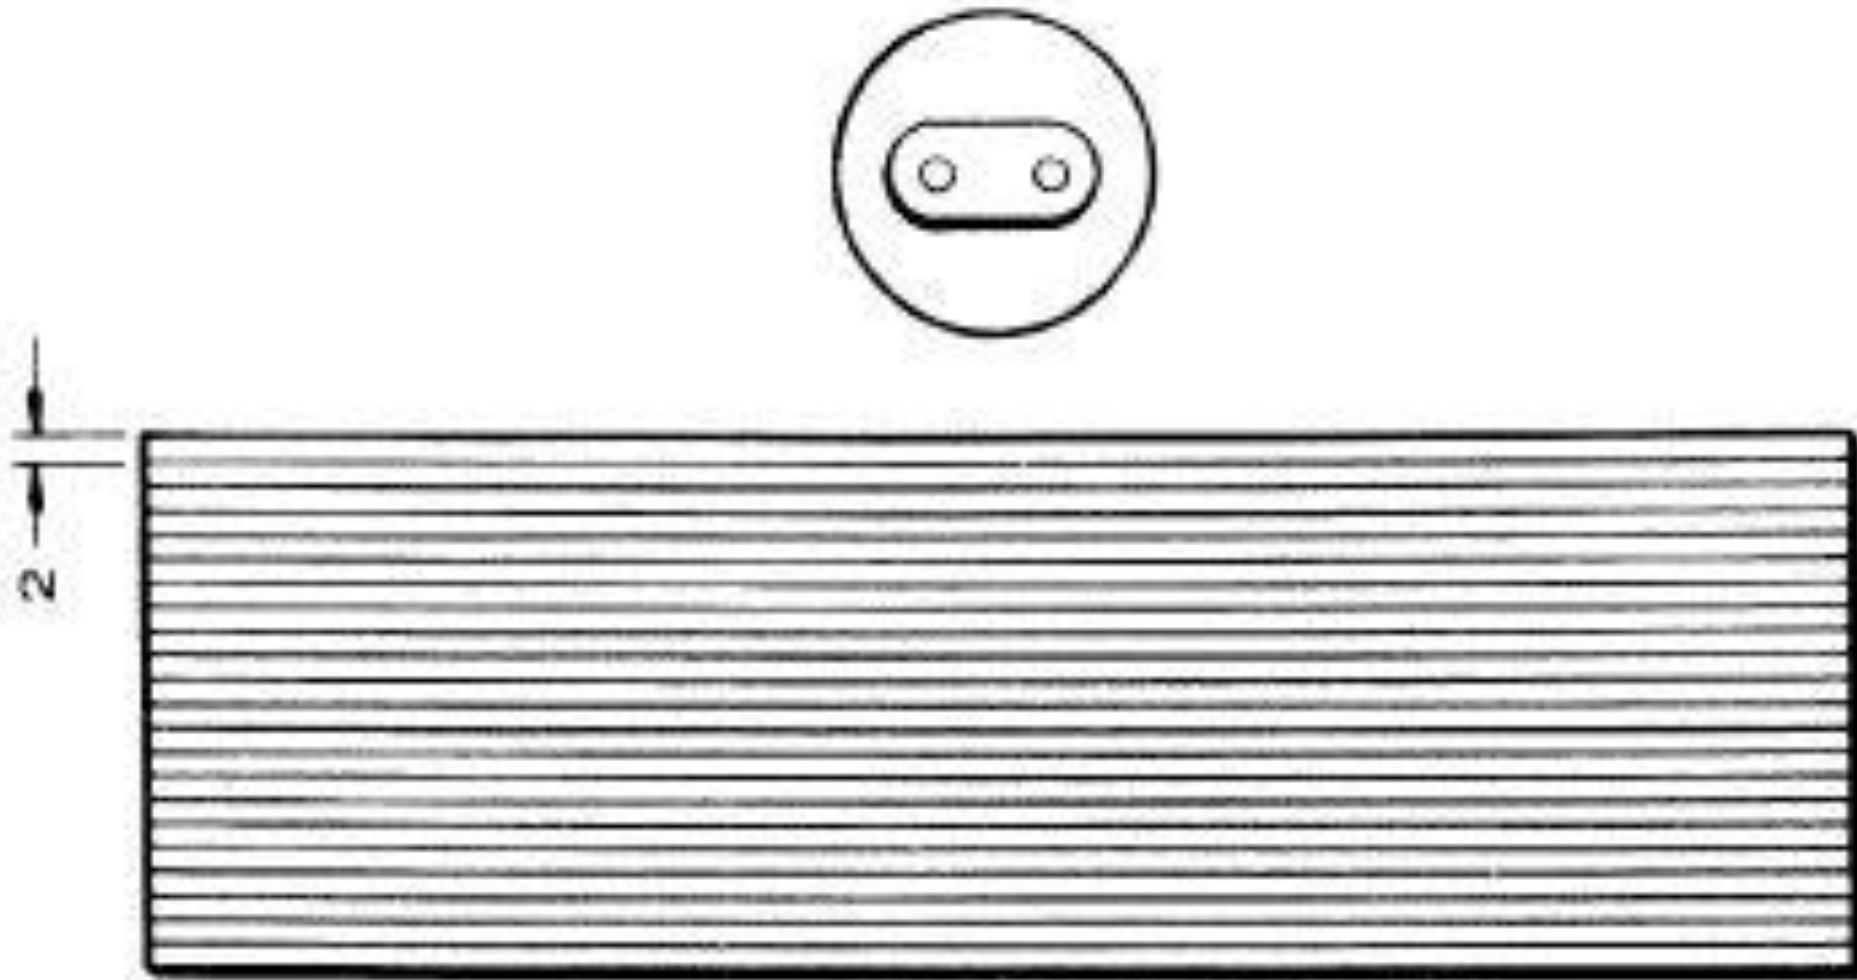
Number of strips obtainable with narrow strip blank layout.
